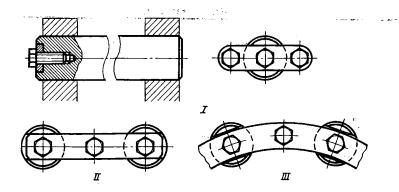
Pivot pins fixed against axial and angular displacements by end plates
